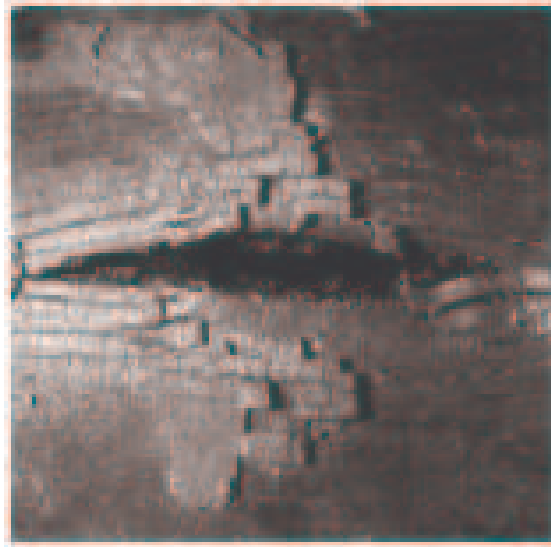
Fatigue cracks in boiler steam pipes
